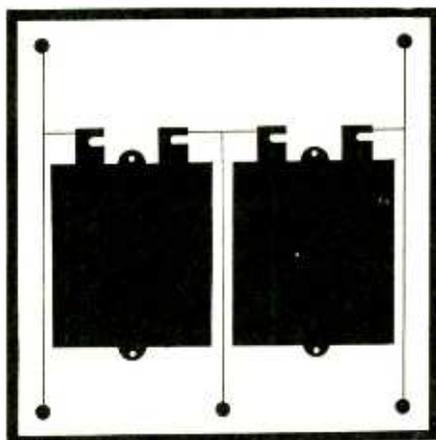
Layout of Coil Form With Condensers Mounted on Side
